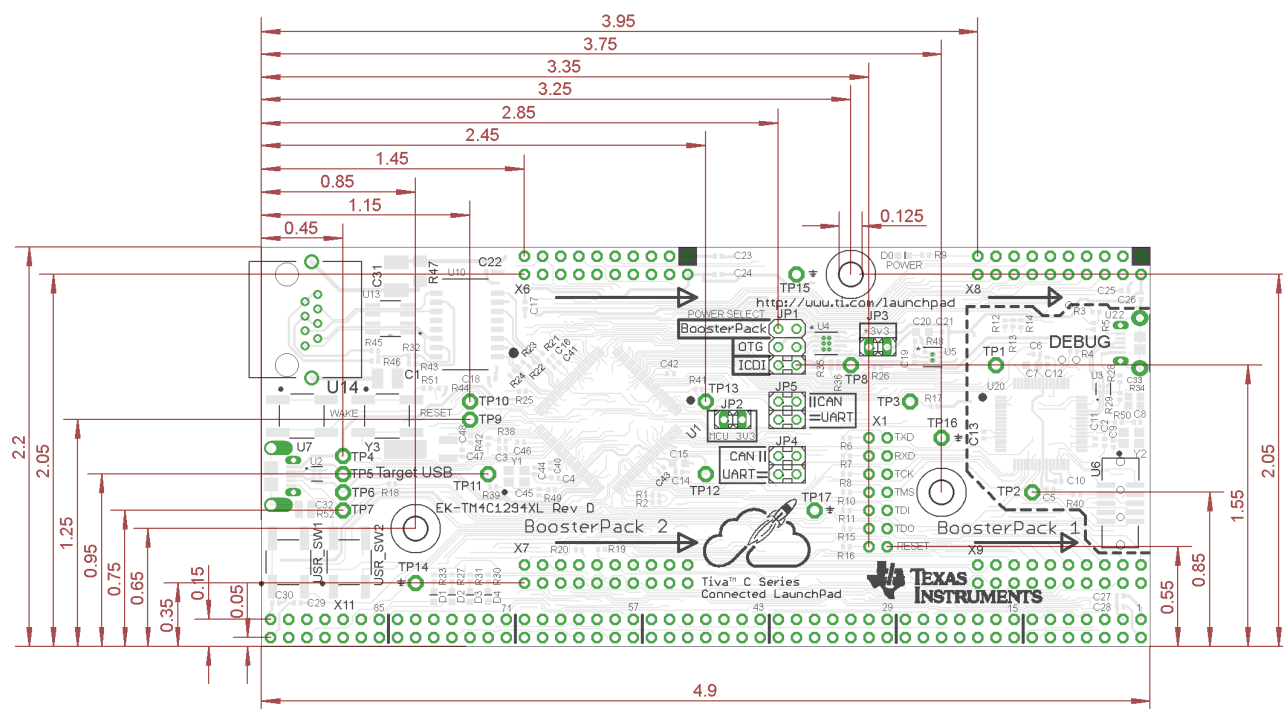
Connected LaunchPad Dimensions and Component Locations
